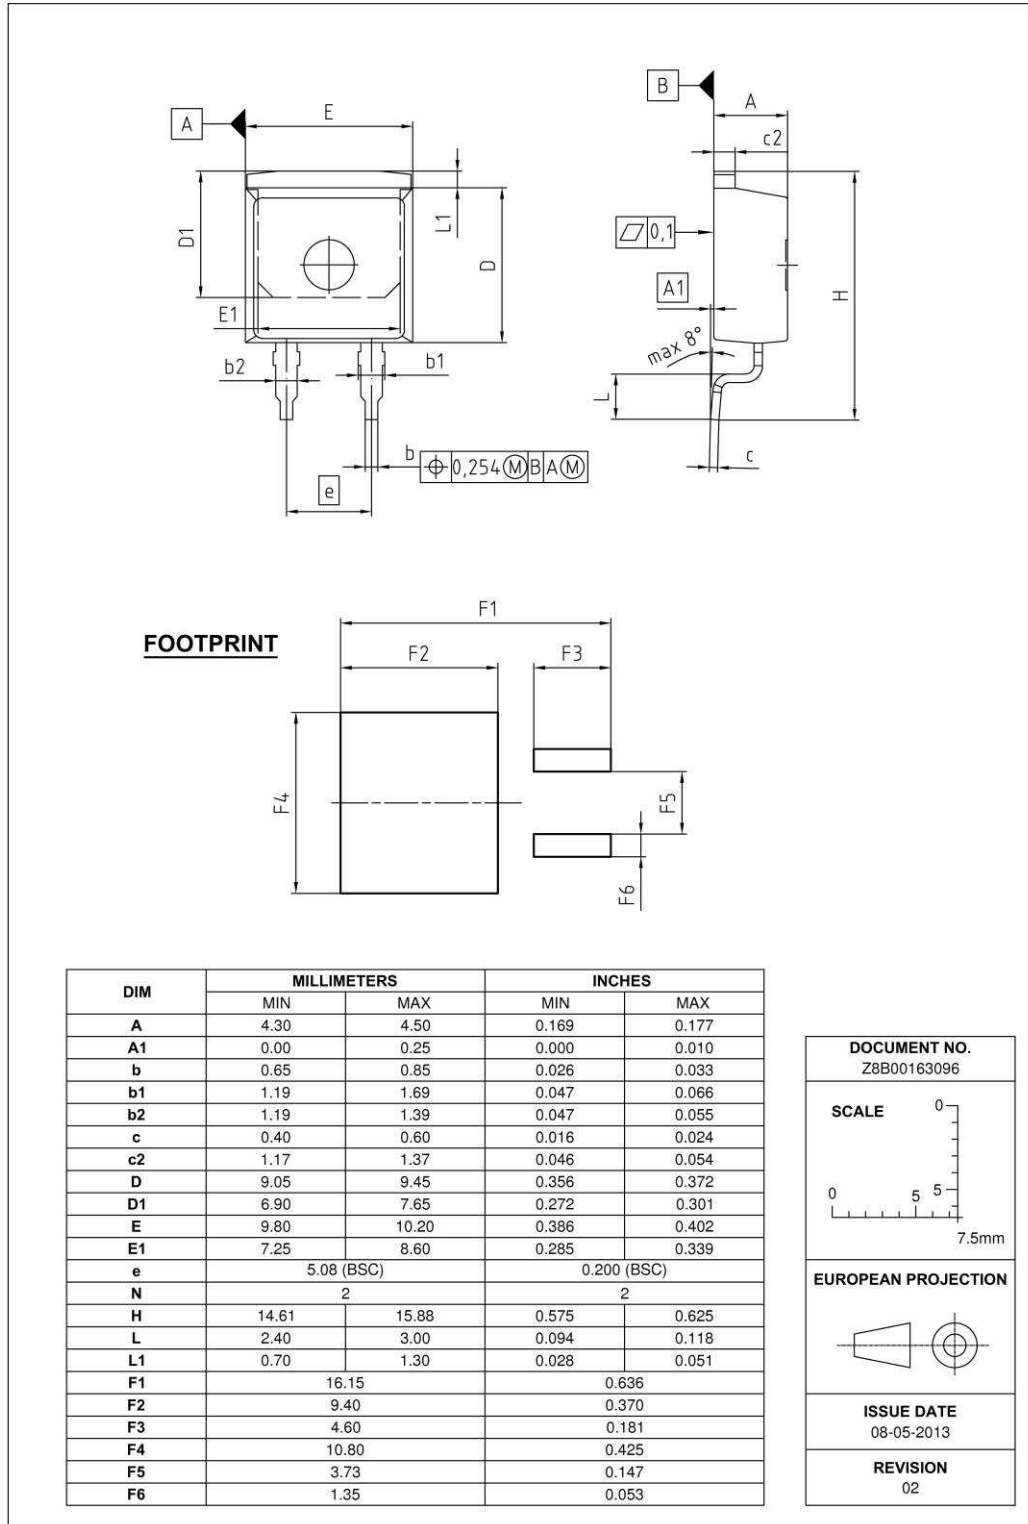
Outlines TO-263-2, dimensions in mm/inch
